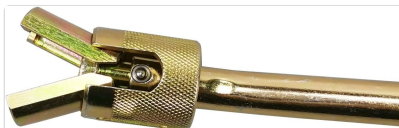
Close-up of the tool's gripping mechanism, which expands to secure the injector.
